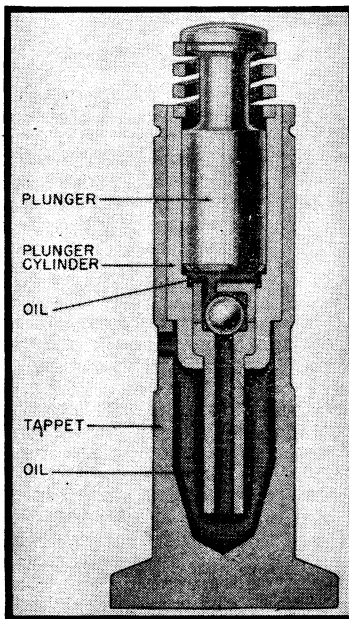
Hydraulic valve lifter used on some 281 and larger six-cylinder engines
